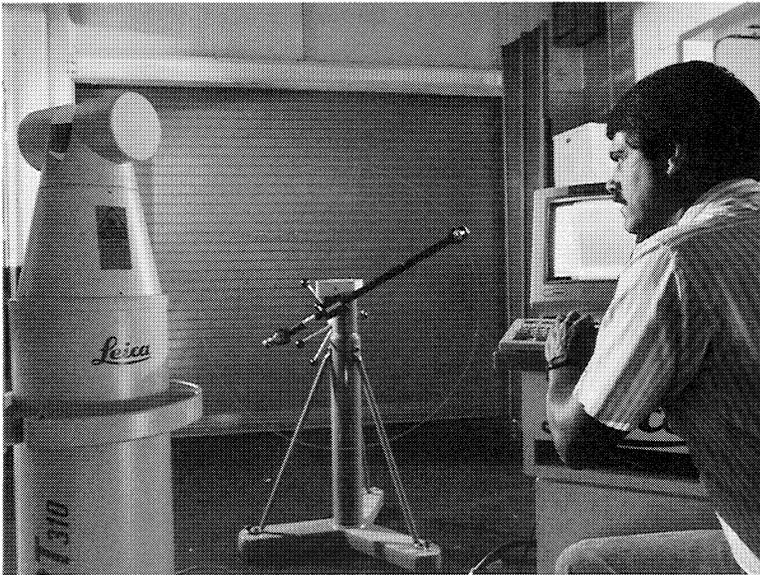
An inspection engineer at the Y-12 Plant operates a portable coordinate measuring machine known as a laser tracker. The laser beam emitted by the device at left is able to track a moving object, such as the mirror mounted on the end of a rotating arm. The machine is used to inspect large shapes.
